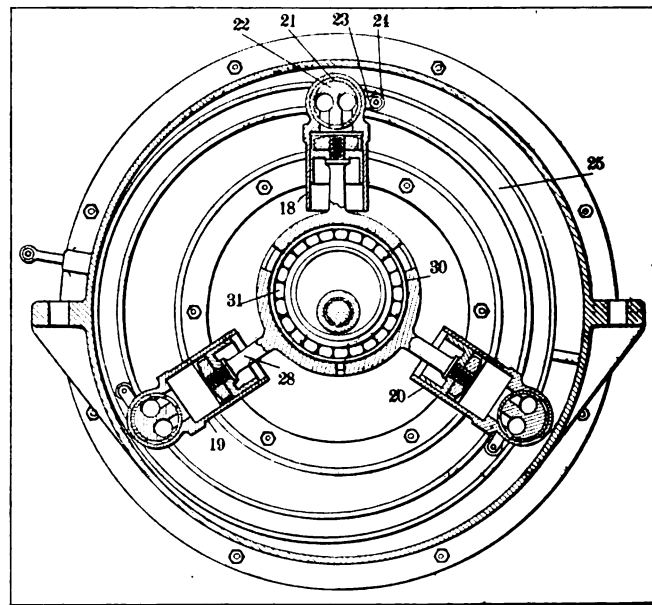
Mounting of driven pumps—Section B B in Fig. 1
